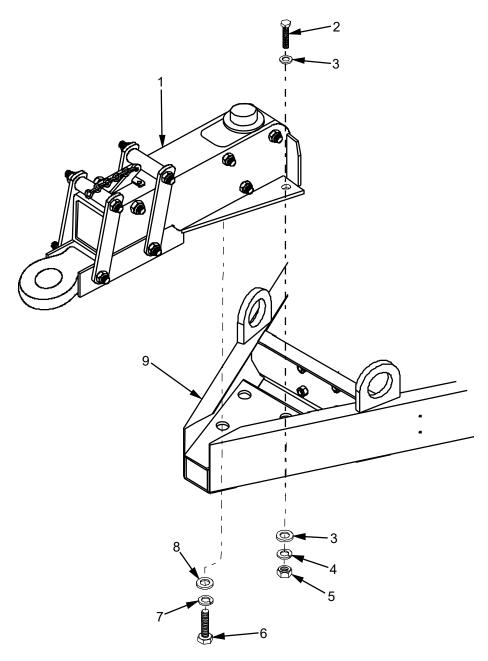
Brake Actuator Assembly (New Version) Removal/Replacement.
